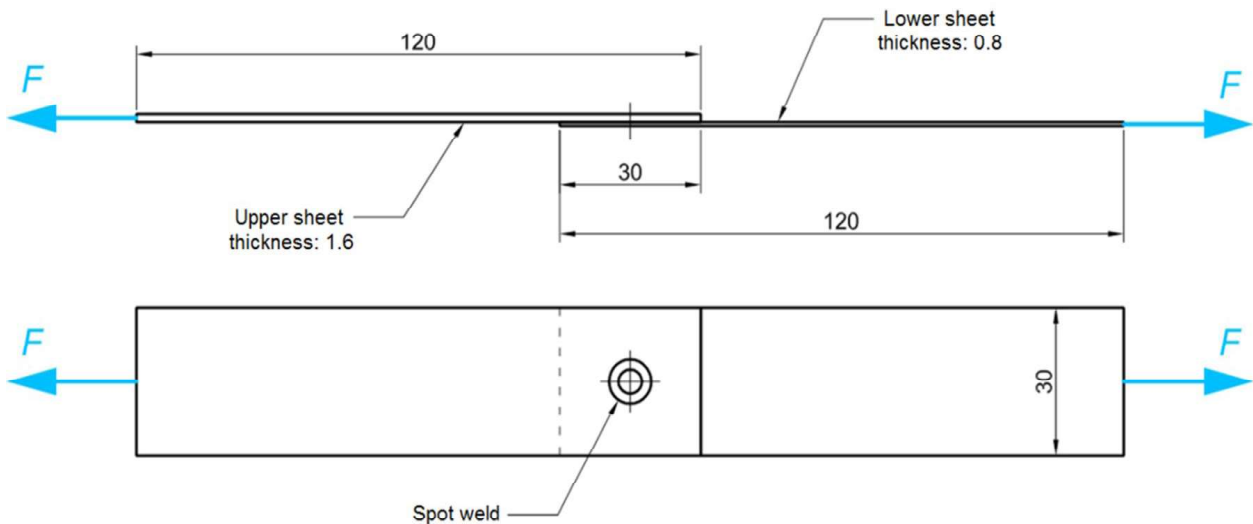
Shape and dimensions (in mm) of the welding specimens
